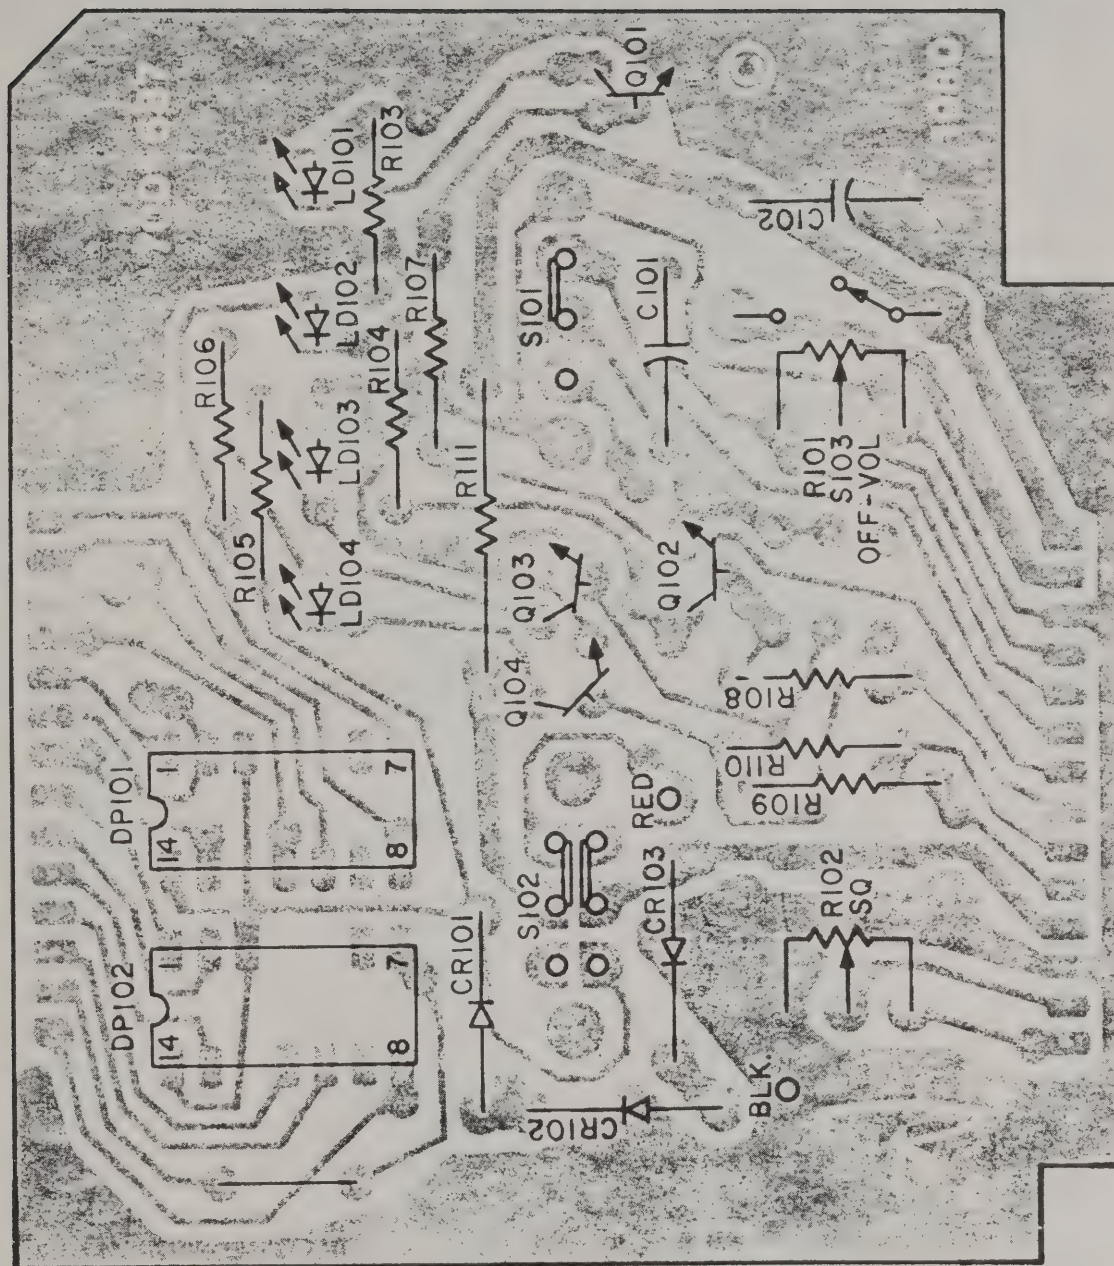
B. Parts Placement, Control PCB Assembly; Bottom View.
